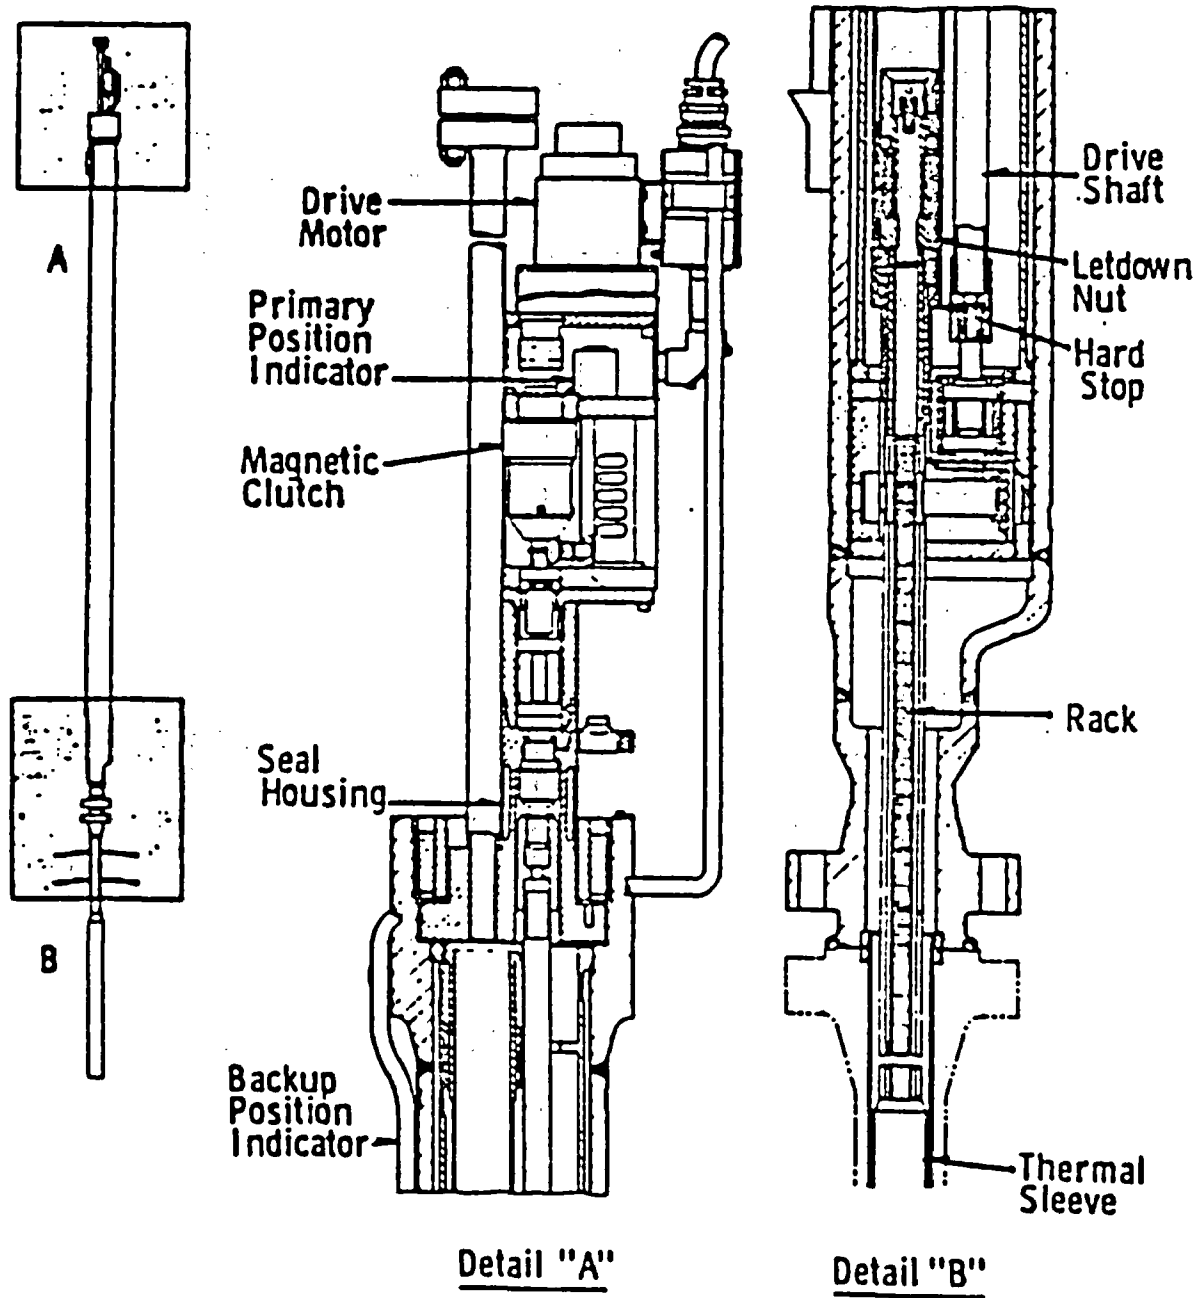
Combustion Engineering rack and pinion CEDM.⁽⁷⁾
